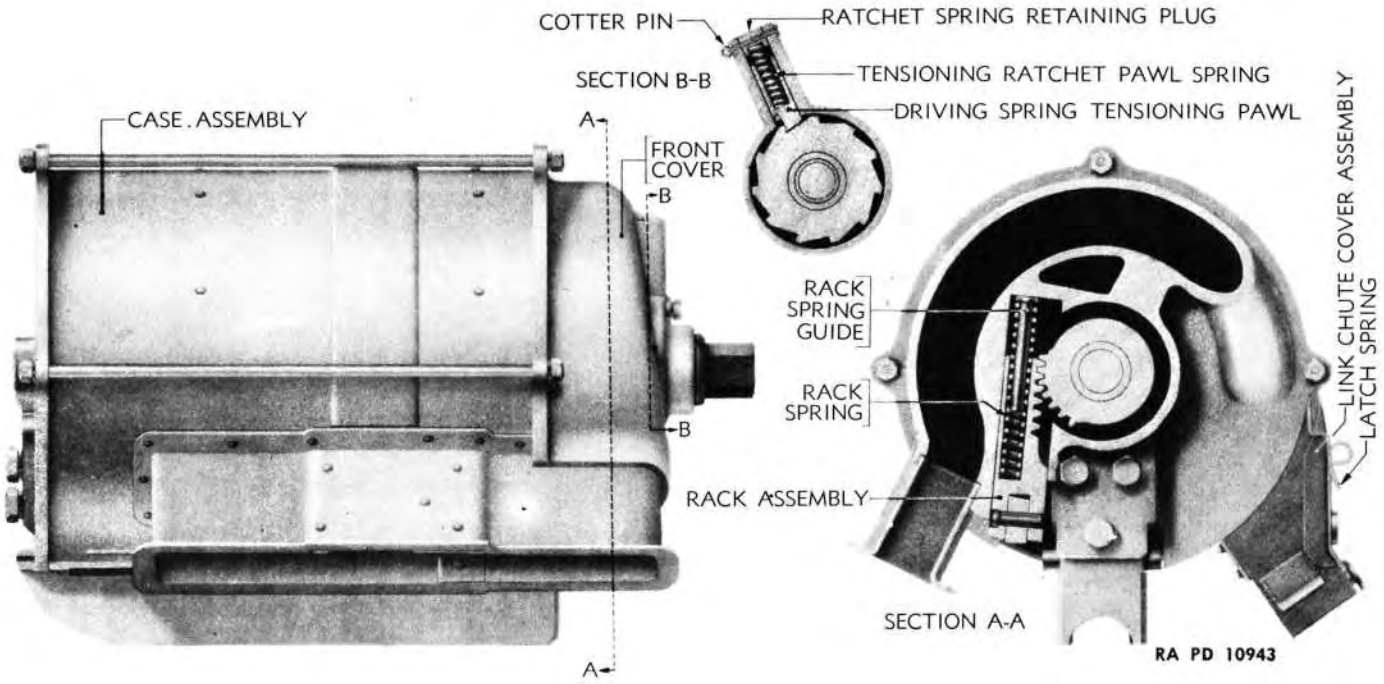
20-MM Feed Mechanism AN-M1 — Front Cover Sectional Views
